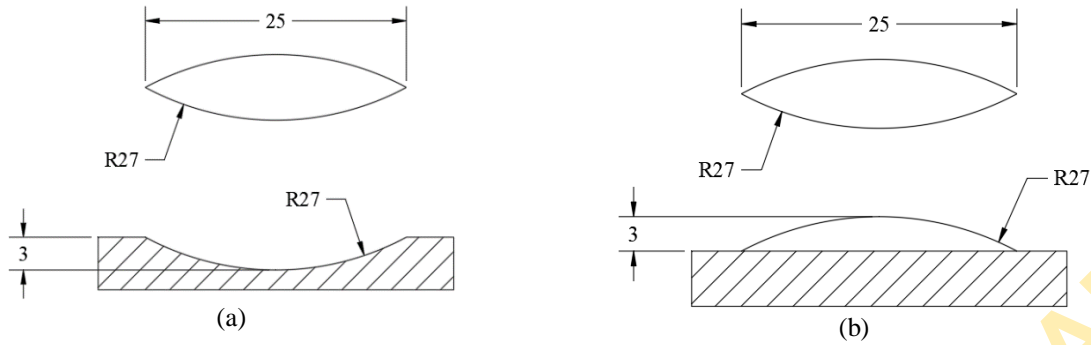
Geometrical shapes of (a) dimple and (b) protrusion (dimensions in mm)
